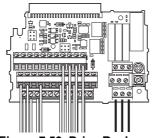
Drive Replacement: Removable Terminal Board Disconnected from the Drive
